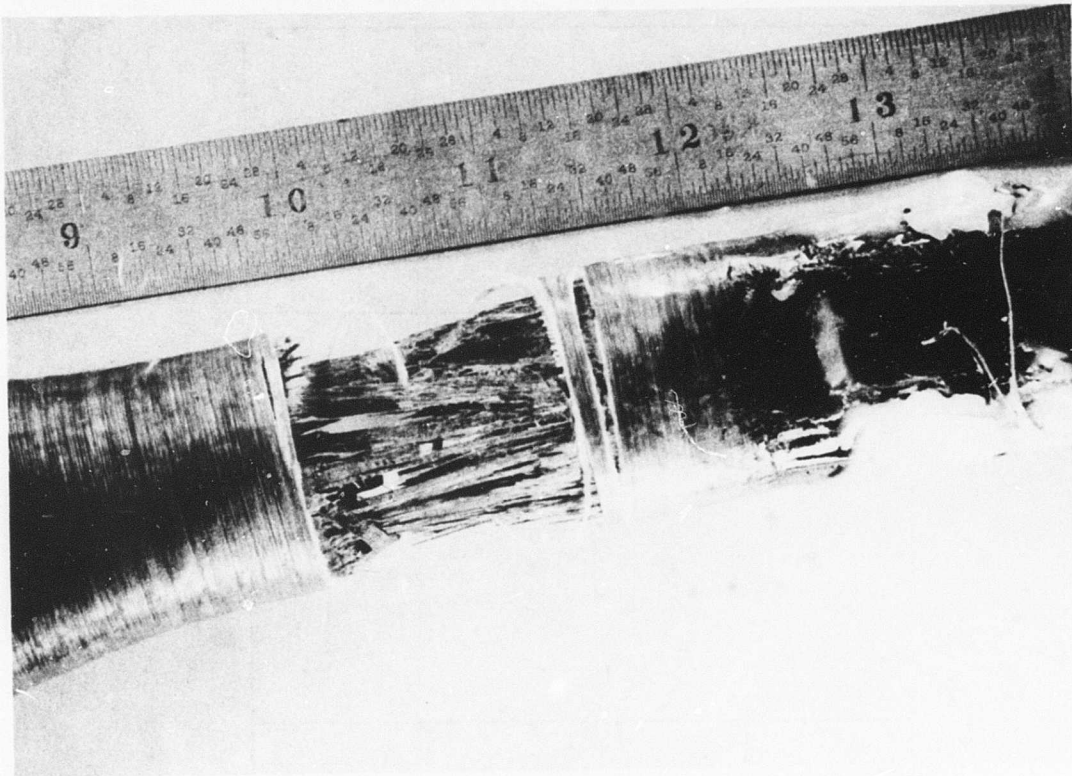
Fracture Produced in Fatigue Test of Spar 6.
